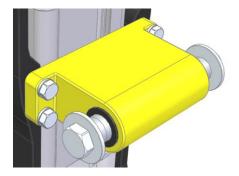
Shaft inserted through the lower bracket joint and fixed to support the suspension module in the UNP-beam.
